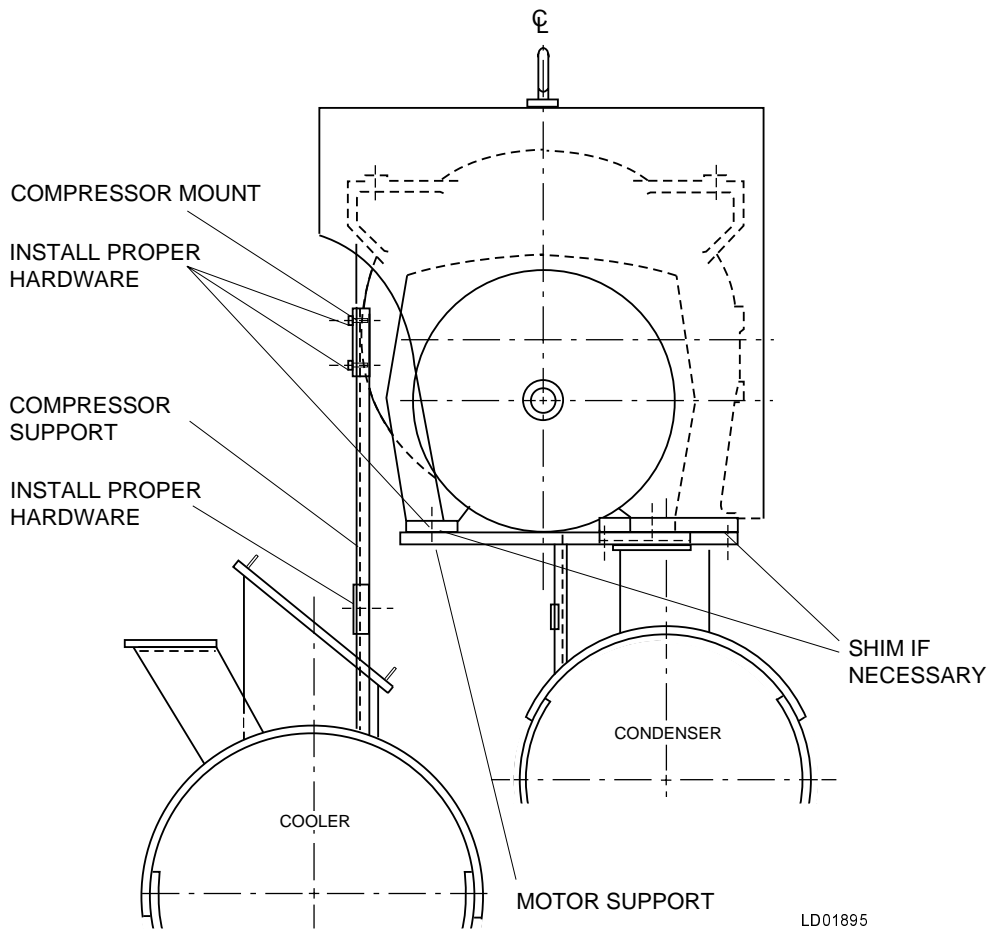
MOUNTING COMPRESSOR / MOTOR (B & C COMPRESSOR UNITS)
